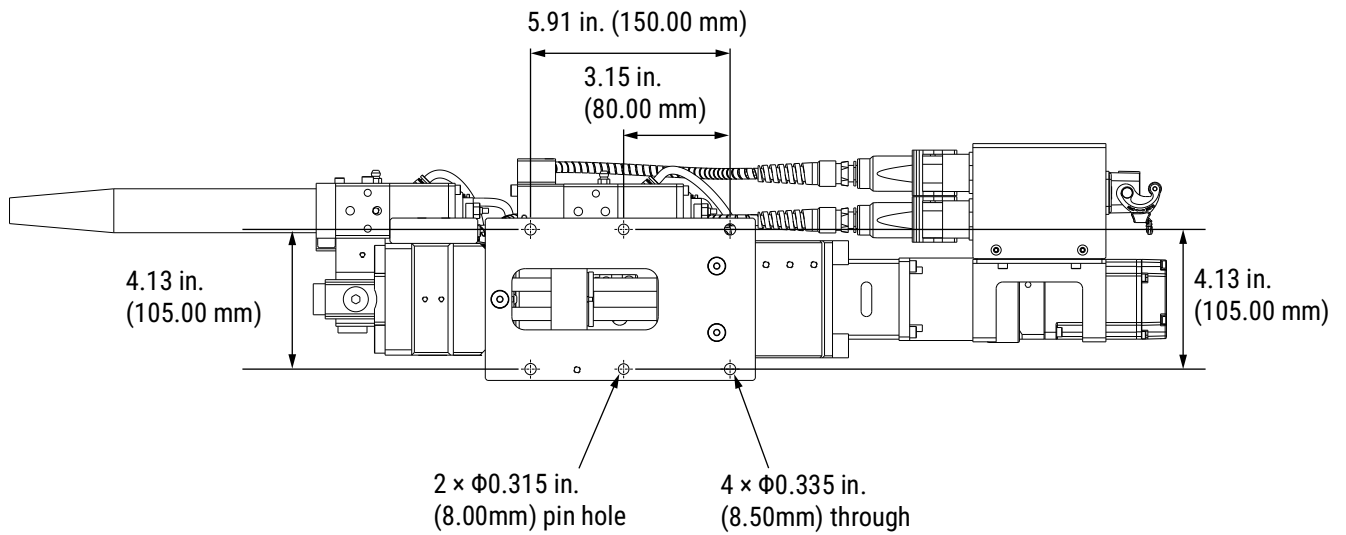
Mounting Hole Dimensions for Installing the PSM Warm Melt Metering Unit - 25cc and 50cc
